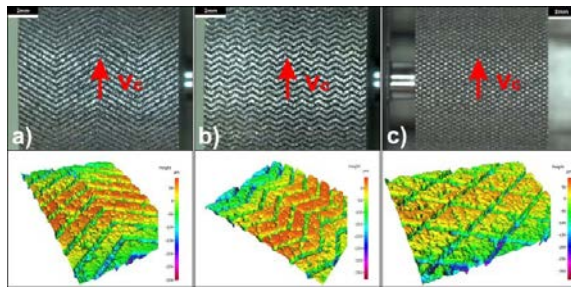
Microstructures on surfaces of CBN grinding wheels.
